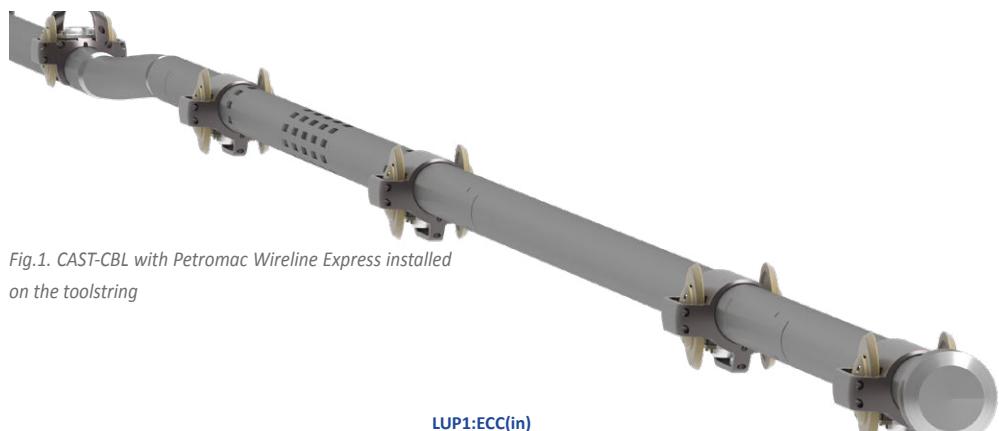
CAST-CBL with Petromac Wireline Express installed on the toolstring
